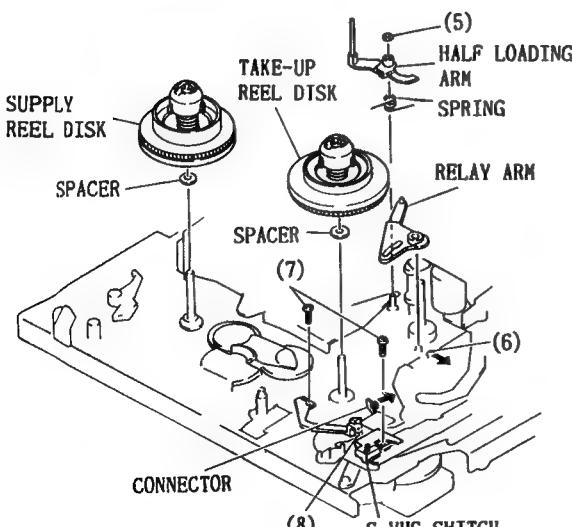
Supply/Take-up Reel Disks, Half Loading Arm, Relay Arm and S-VHS Switch
